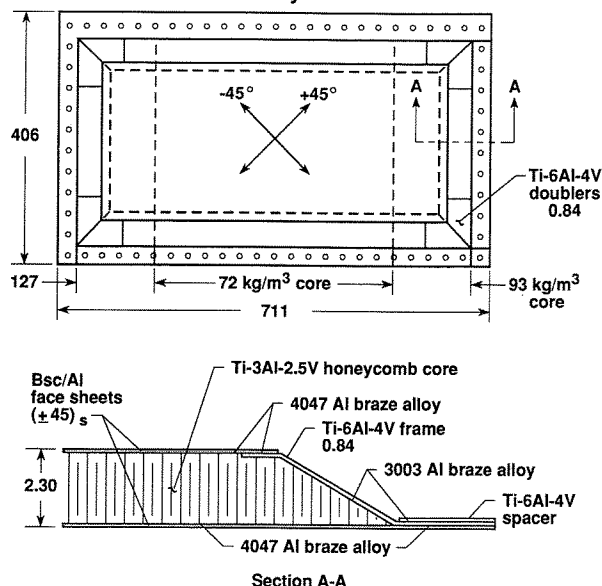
Configuration of Borsic/aluminum honeycomb-core sandwich panels. Dimensions are given in millimeters.
